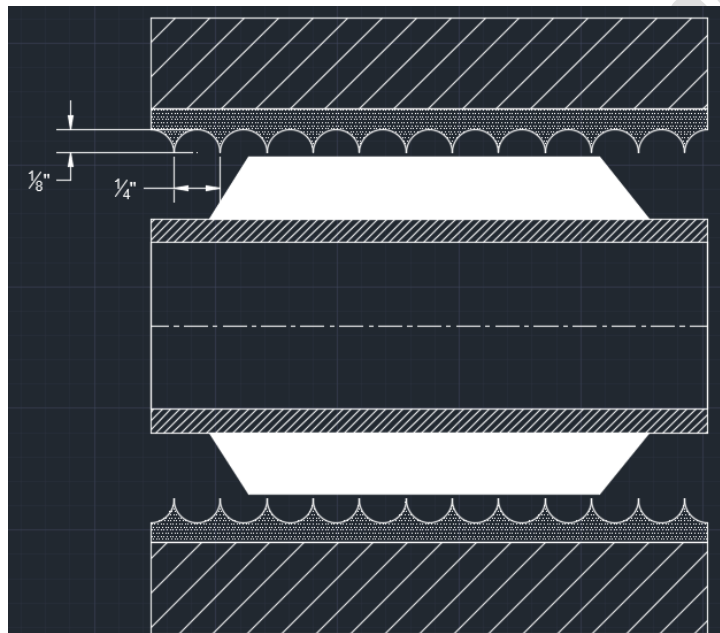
Illustration of Open Hole Test Fixture Internal Profile
